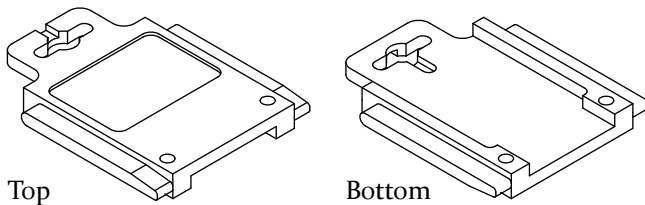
Isometric drawing of the well plate, 1 : 1 scale.
